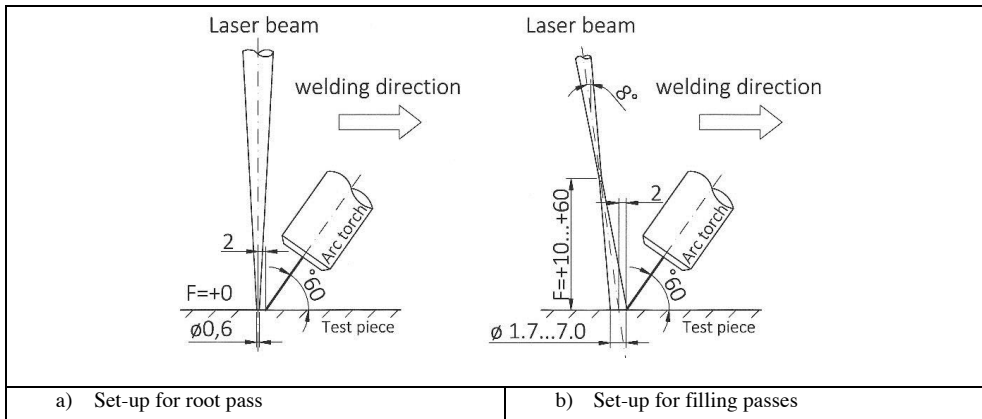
Set-up used in welding tests: a) Key-hole mode in welding of root pass and b) Conduction limited mode in welding of filling passes. F number (e.g. 0, +10...+60) indicates focal point position.
